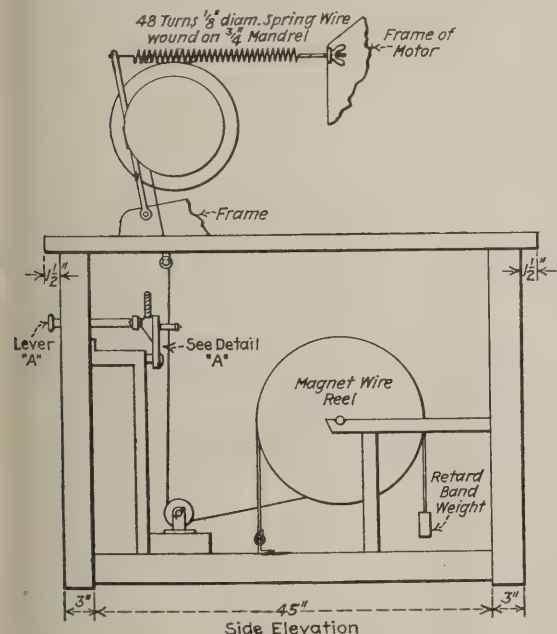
Construction Details of Field Coil Winding Machine Shown in Fig. 5
